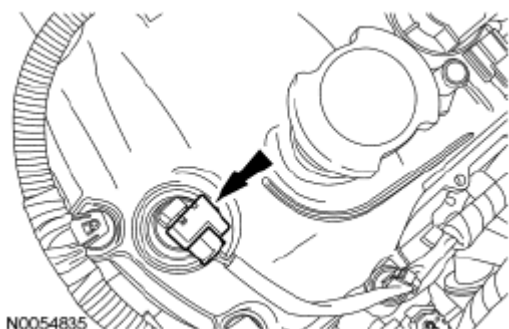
Locating LH VCT Solenoid Electrical Connector
